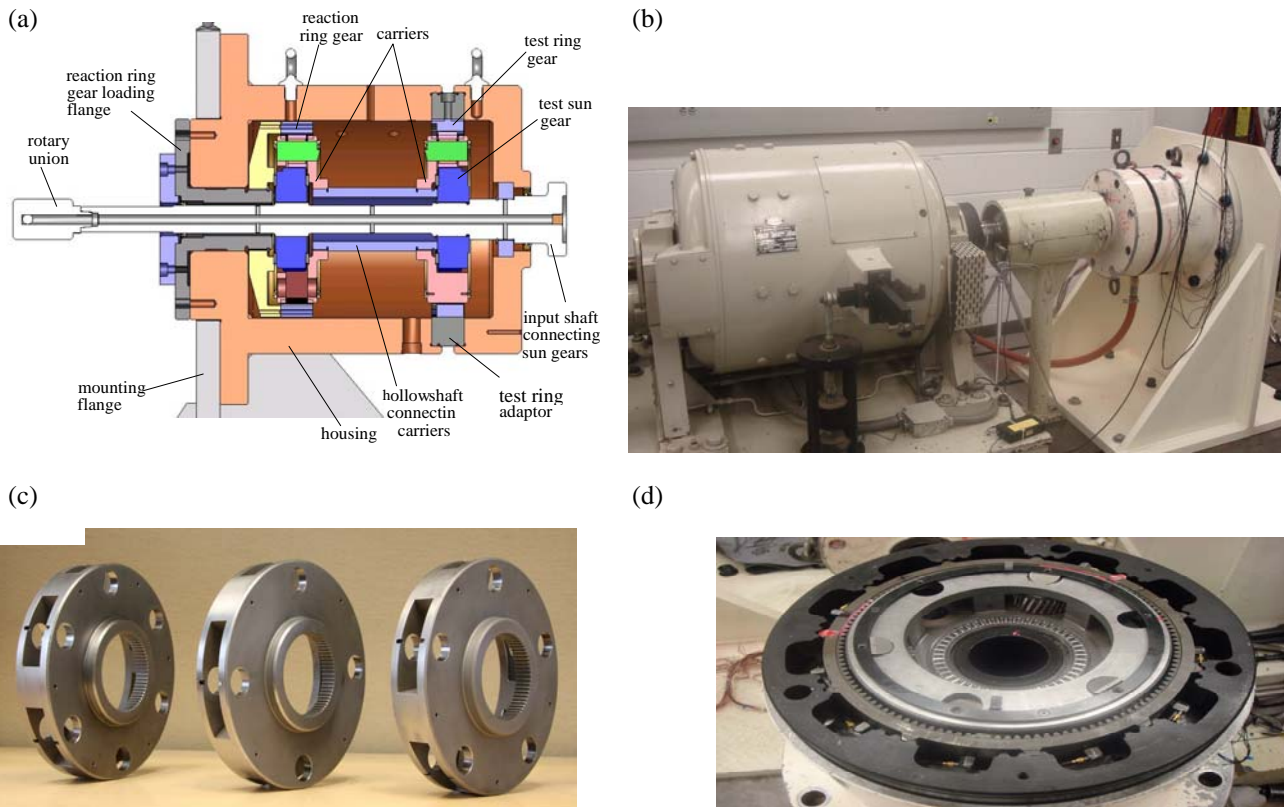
(a) Cross-section of the back-to-back planetary test fixtures, (b) the test set-up on a transmission dynamometer, (c) 3, 4 and 5 planet carriers used in this study, and (d) accelerometers mounted radially on the outside surface of the test ring gear.
